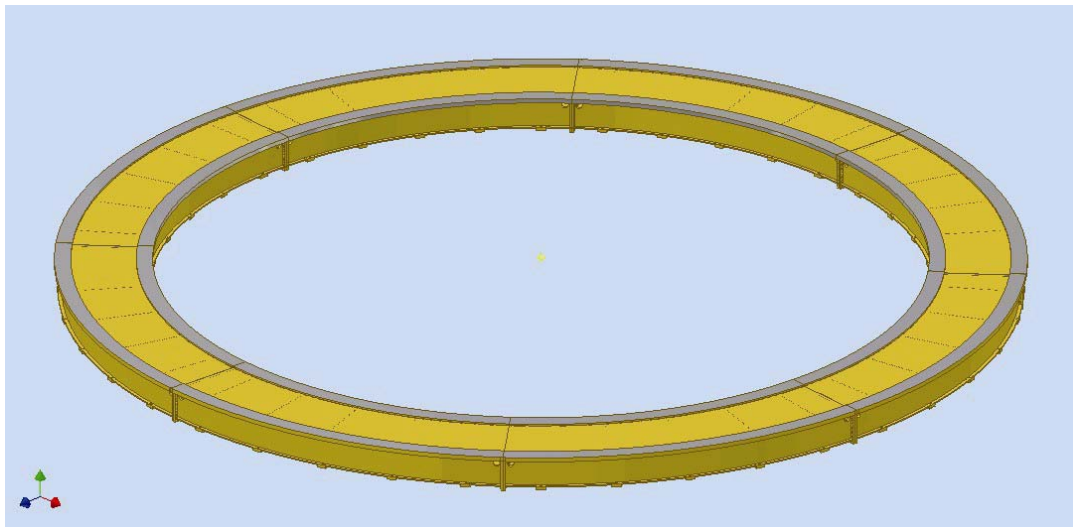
Upper view of azimuth track with machined hydrostatic runner bearings and roller interface surface at upper inside diameter.
